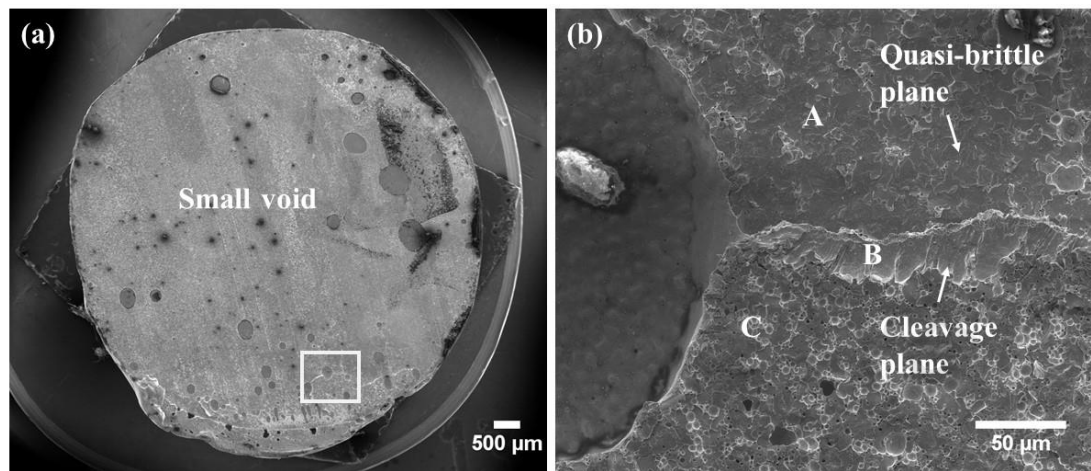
Fractured surface of solder joint without porous Cu at 307°C and 300 s: (a) overall, (b) magnified view of the rectangle marked in (a)
